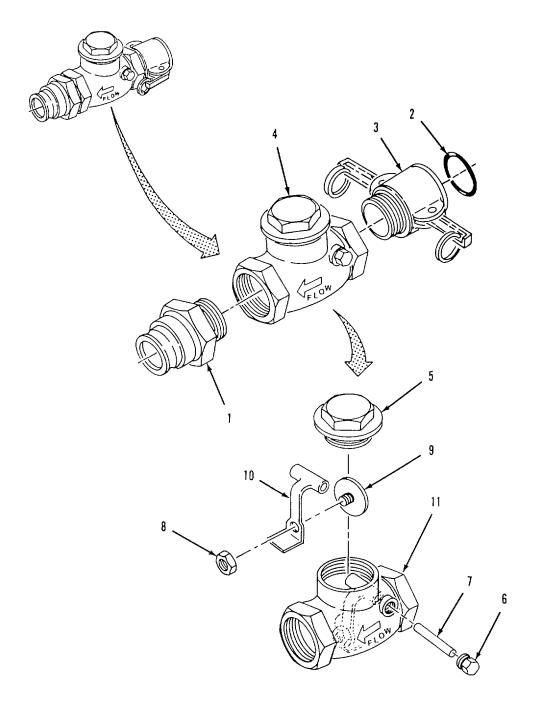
Check Valve Assembly (2-inch) Repair.
